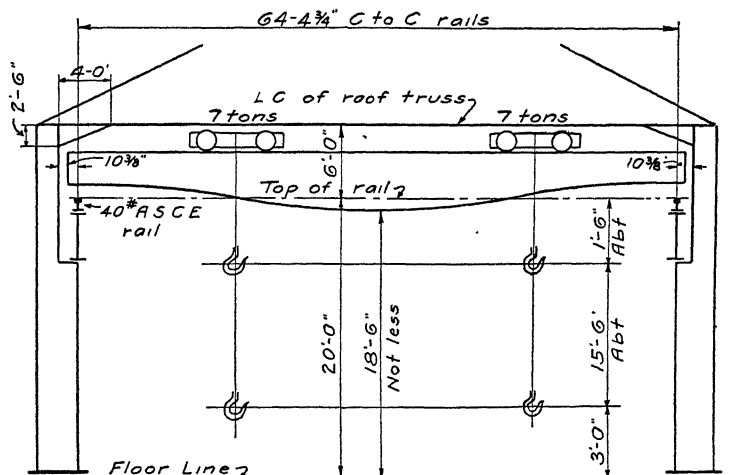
Typical dimension sheet for hand-power O. T. Crane.
